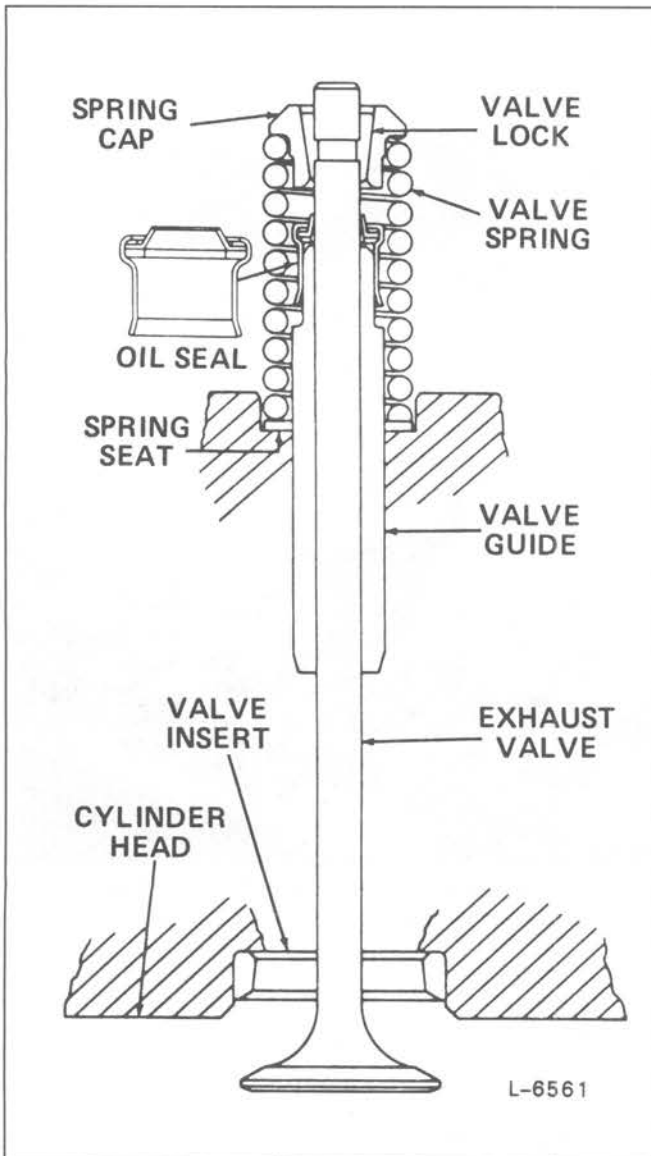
Exhaust Valve, Spring and Seal Configuration
